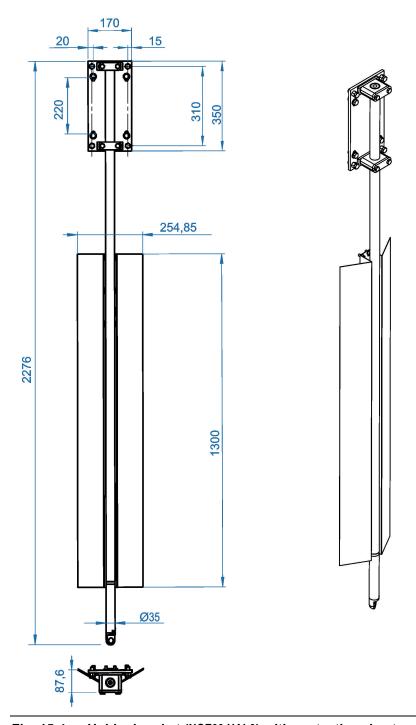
Holder bracket (NOZ00 HAL0) with protective sheet
